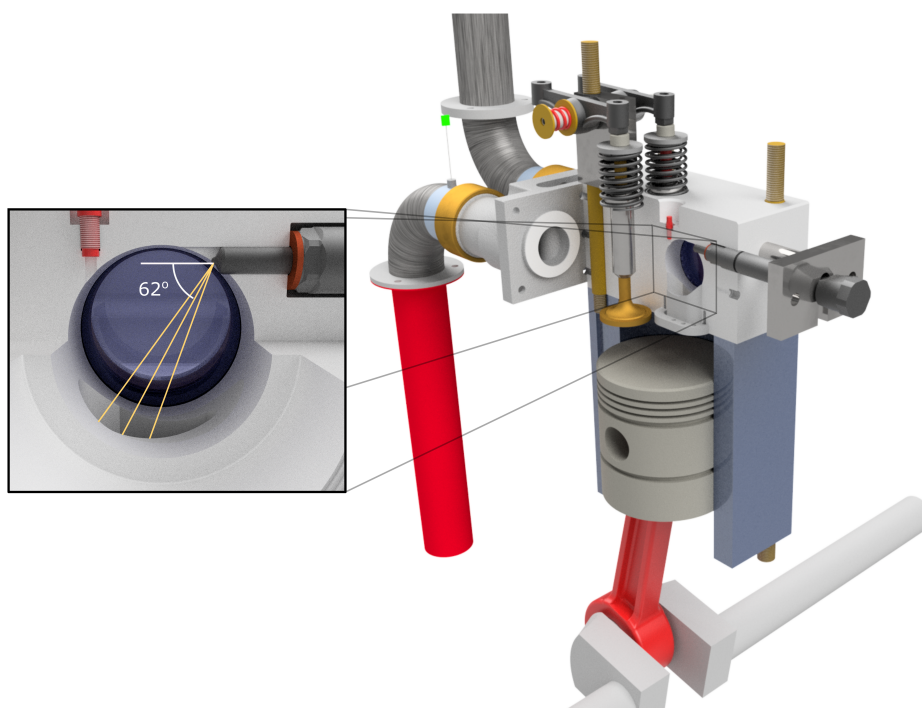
The OACIC with a cross-section of the engine head, including a close-up look of the combustion chamber and the location of the spray.
